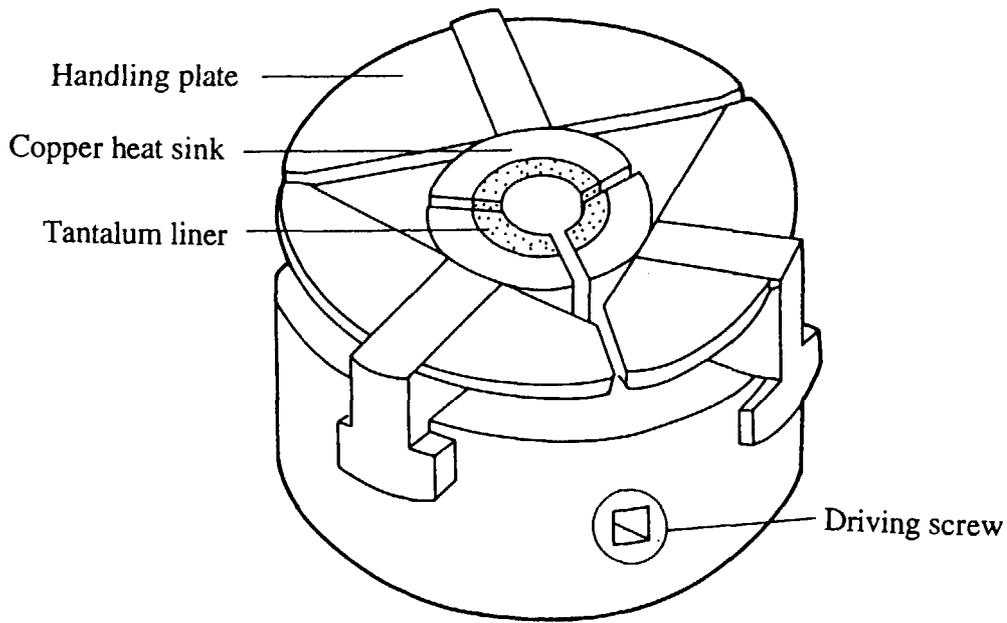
Structure of the capsule chuck in an electron beam welder
